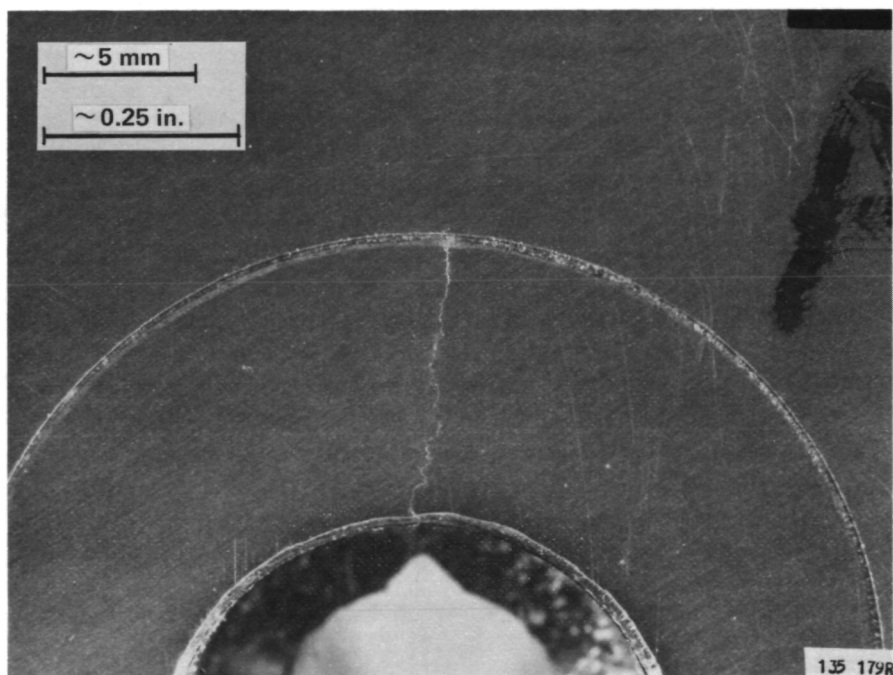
Surface Crack of Disk 19 After Fatigue Precracking
